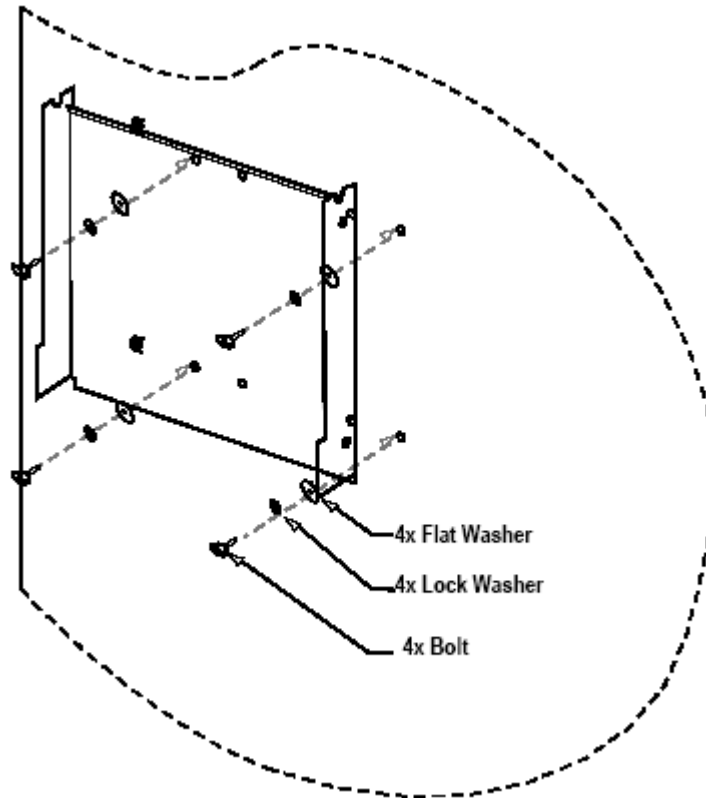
Typical Installation of Rear Mounting Bracket on a Wall
